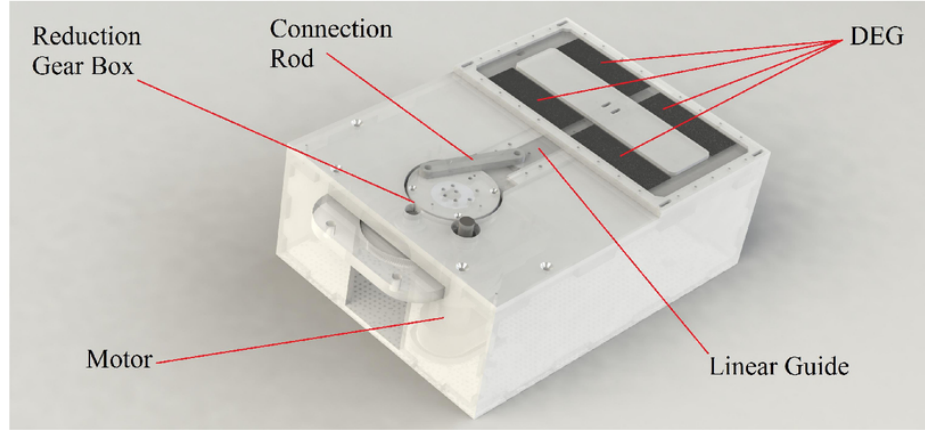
Reciprocating machine used for the ISPC experiments. A crank slider mechanism, moved by a motor, the linear guide attaches under the panel attached to the membrane with the DEGs and slides in a reciprocating movement. Reproduced from [62].
